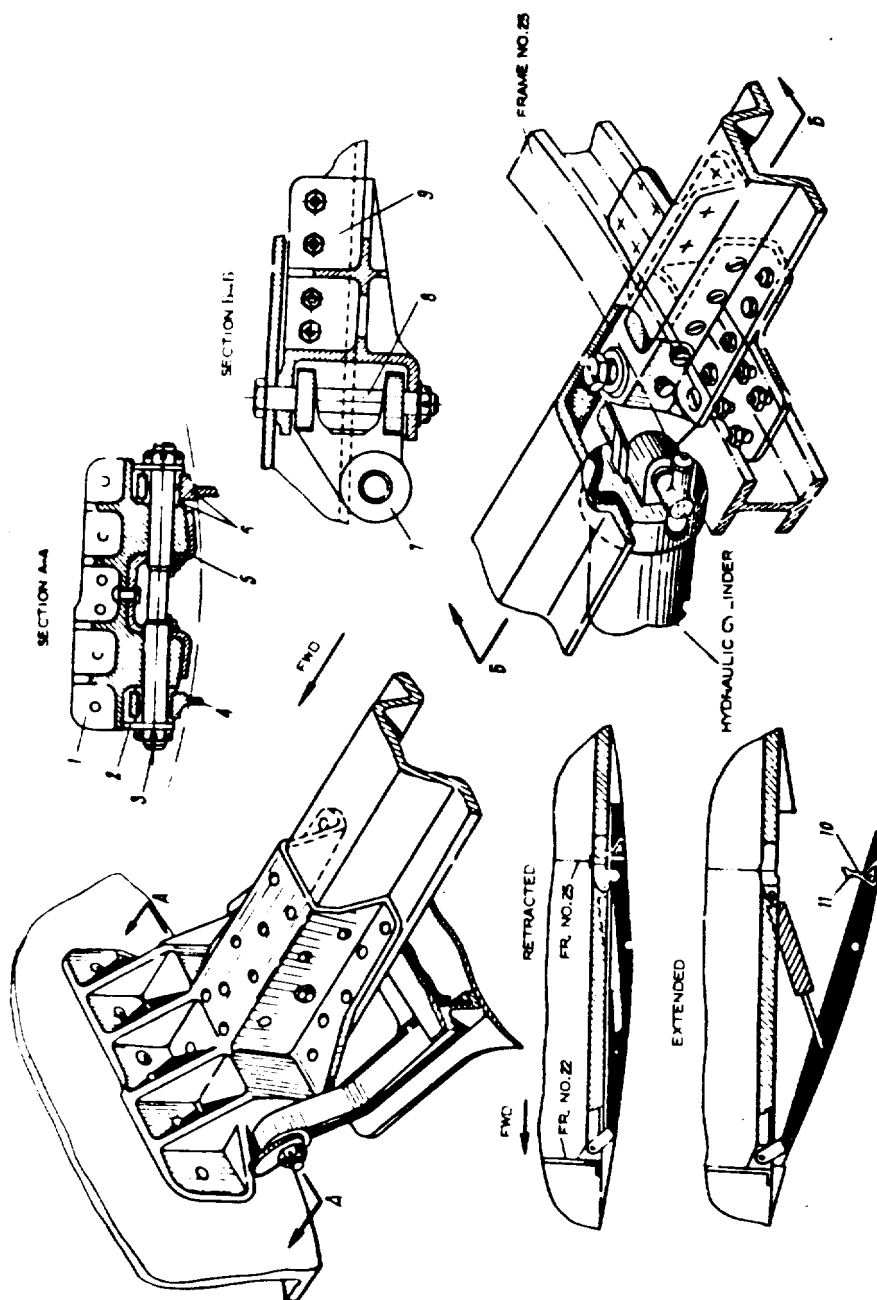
REAR AIR BRAKE ATTACHMENT UNITS
